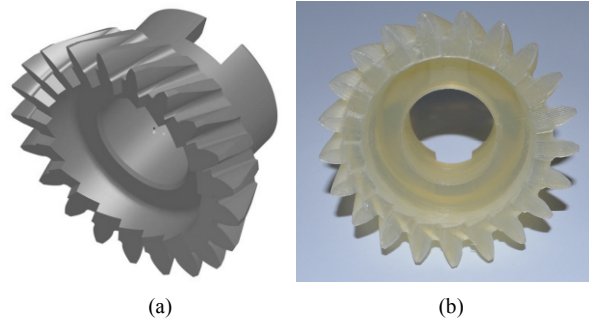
Design of skiving cutter: (a) 3D modeling; (b) skiving cutter by 3D printer.
